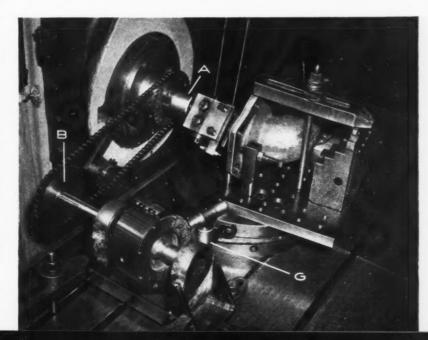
Angular throw mechanism used in conjunction with a circular table on a horizontal boring mill permits a groove to be machined to a uniform depth within plus or minus 0.005-inch total indicator reading.
